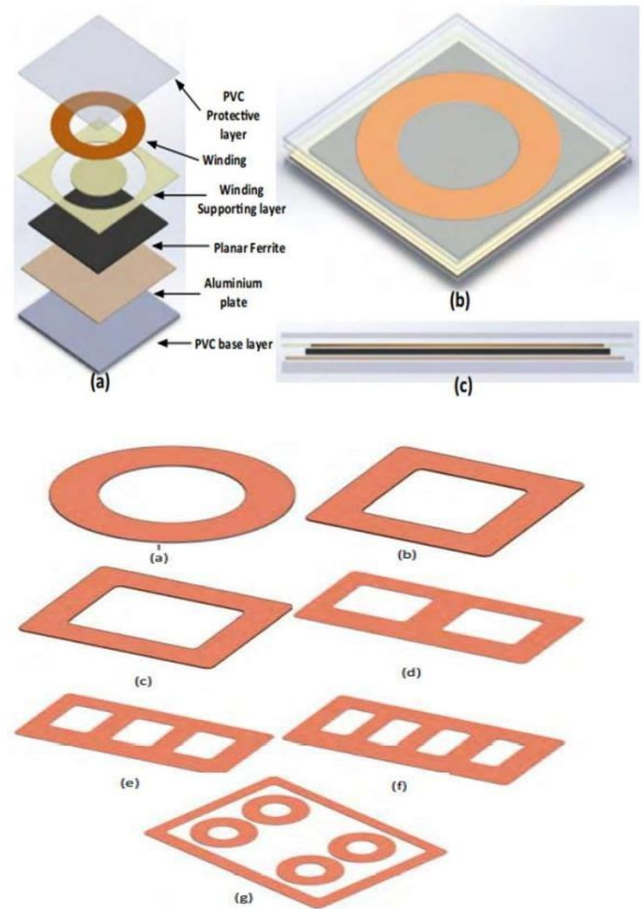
Wireless Transformer (a) exploded view (b) Top view (c) Cross-section and Coil shapes (a) Circular (b) Square (c) Rectangular (d) Double D (e) Bi-polar (f) Double-D quadrature (g) Quad-D quadrature
